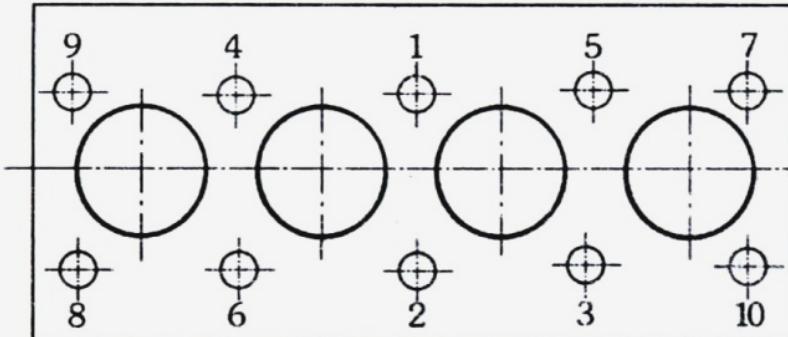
Adjustment sequence of the bolts in the cylinder head
